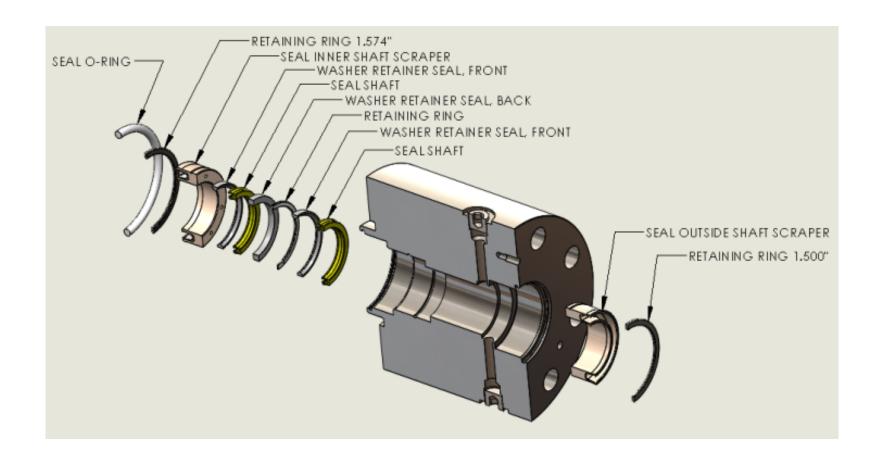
Seal retainer – Exploded mid section view (003-090)
